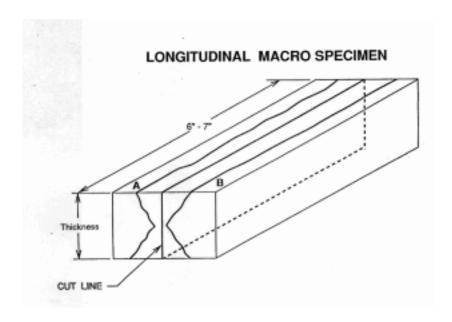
Longitudinal metallographic specimen designed to inspect for flaws in weldments (Electric Boat Corporation).
